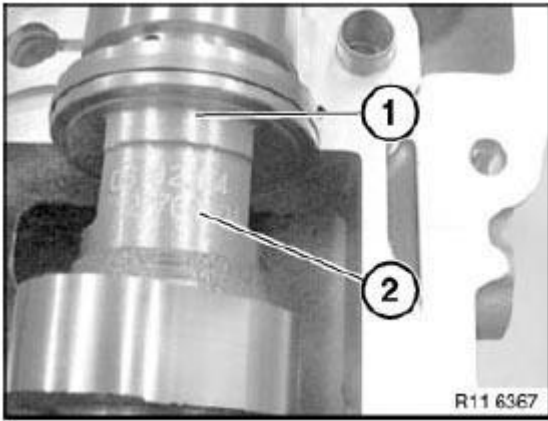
Identifying Part Numbers And Exhaust Camshafts
